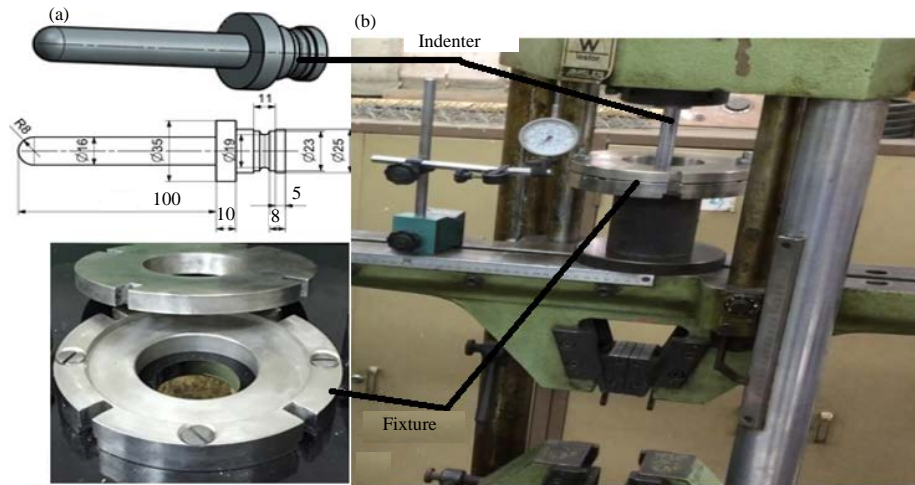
(a, b): Fixture and indenter (a) and Fixture positioning in the quasi-static test (b)
